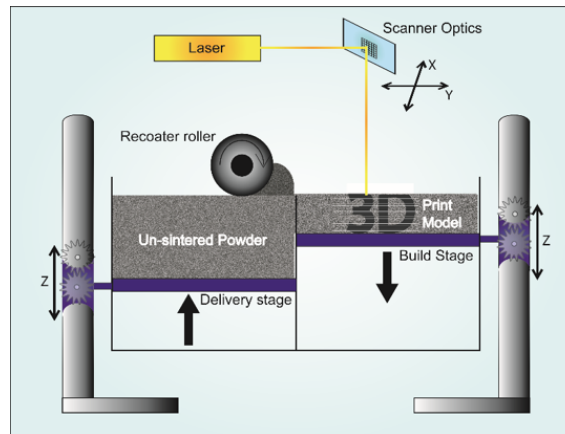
A schematic diagram of the selective laser sintering/melting printer.
